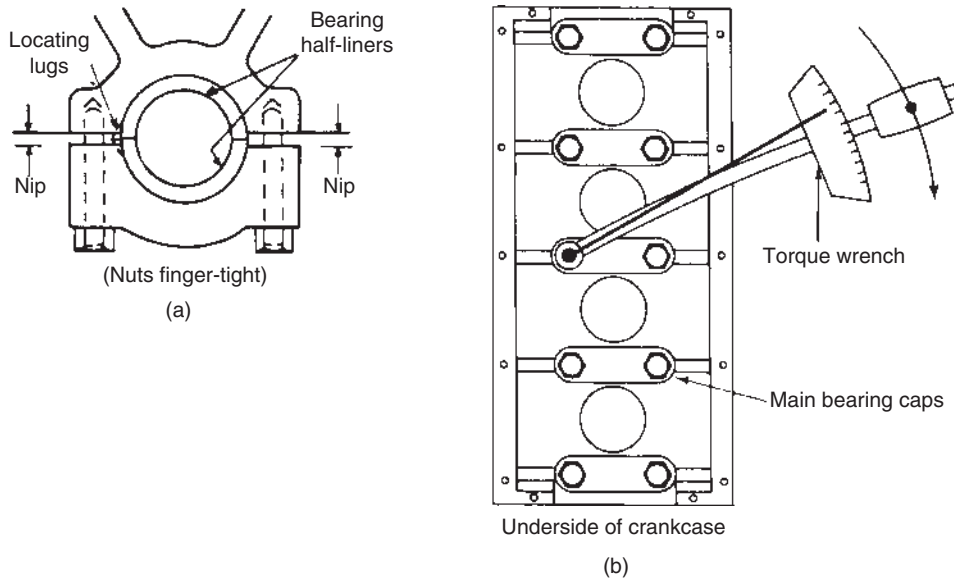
Installation of crankshaft: (a) main bearing nip (b) torque tightening the main bearing caps
